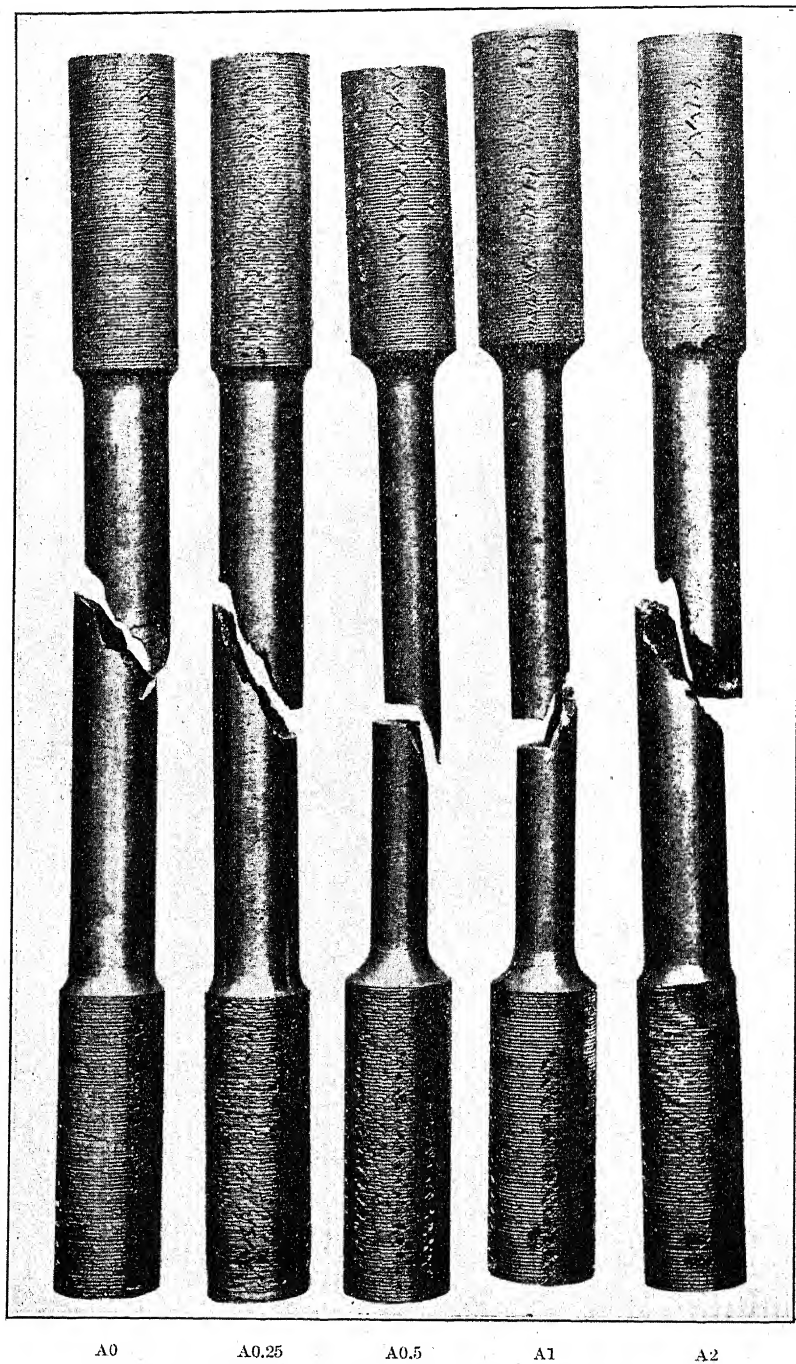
WELDED SPECIMENS AFTER FRACTURE.
